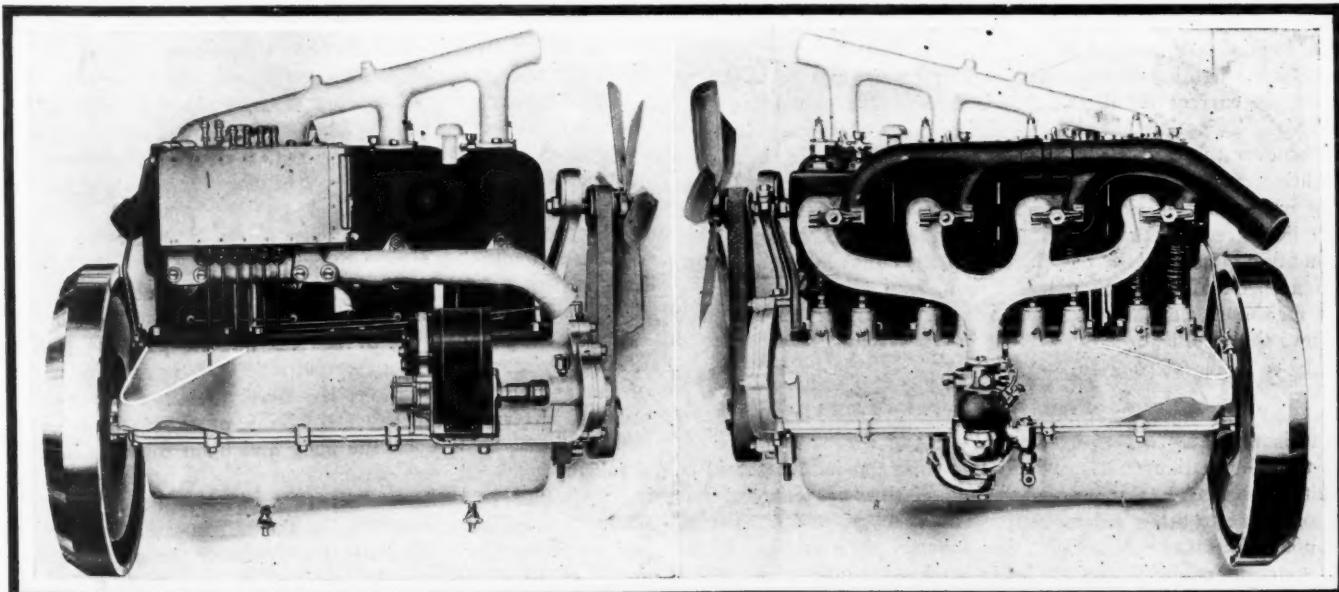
View of both sides of the model 69 Overland motor, showing magneto, carburetor and mechanical oiler
